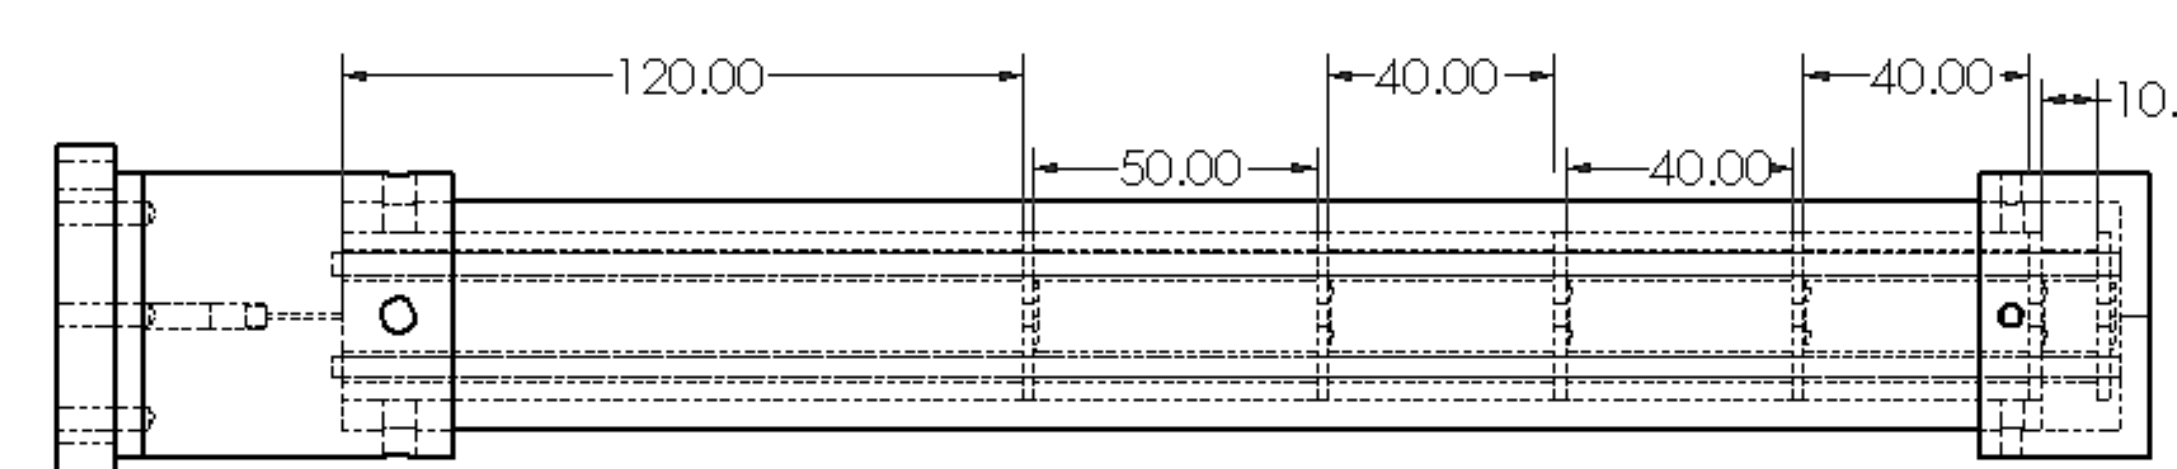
Collimator assembly with dimensioned separations between collimation elements. Separation and alignment of these slits is extremely important in achieving the desired spot size. Each slit is aligned with one another by two stainless steel pins, being kept a specific distance apart with separators. Because our goal is a spot size of 0.2mm, we had to ensure we would be able to fabricate these parts and create the hole sizes we needed. This type of precision can be achieved with laser cutting, which cuts features as small as 15 microns on thicknesses as large as 635 microns [6].
